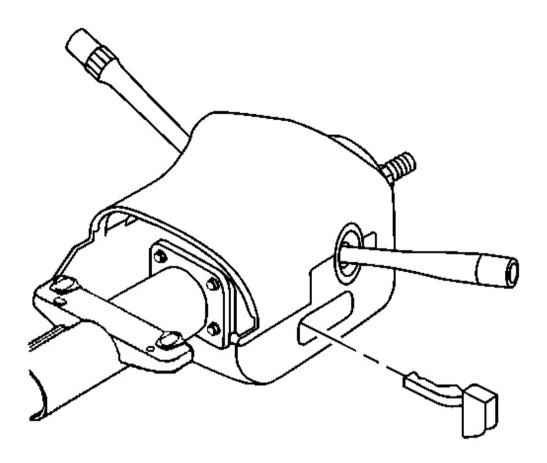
Locking Tab & Tilt Lever Handle Courtesy of GENERAL MOTORS CORP.
